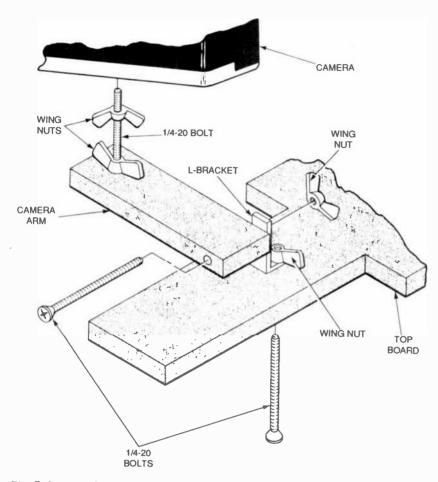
Because the camera arm is mounted this way, it can be adjusted using the wing nuts on both ends of the L bracket.
